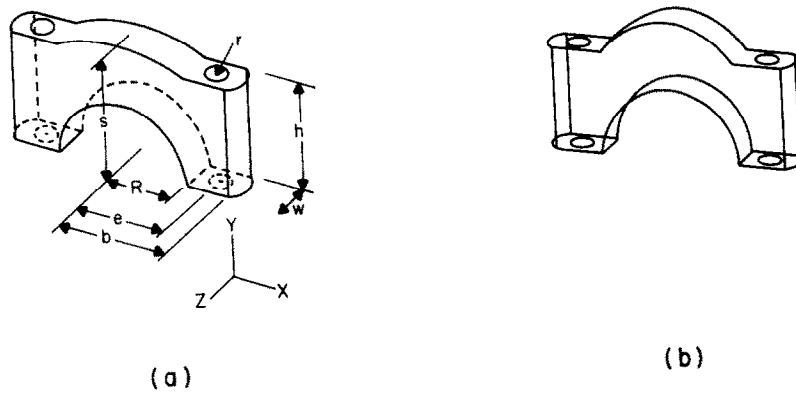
Typical example of 3-D shape design bearing cap, [62]: (a) initial design; (b) final design.
